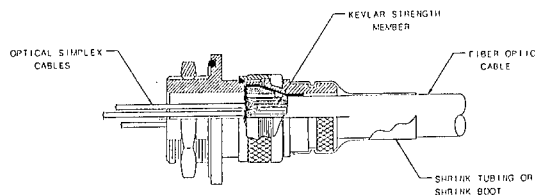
Completed Assembly of the Feed Through Adapter Design No. 1 (Drawing Courtesy of Glenair, Inc.)
